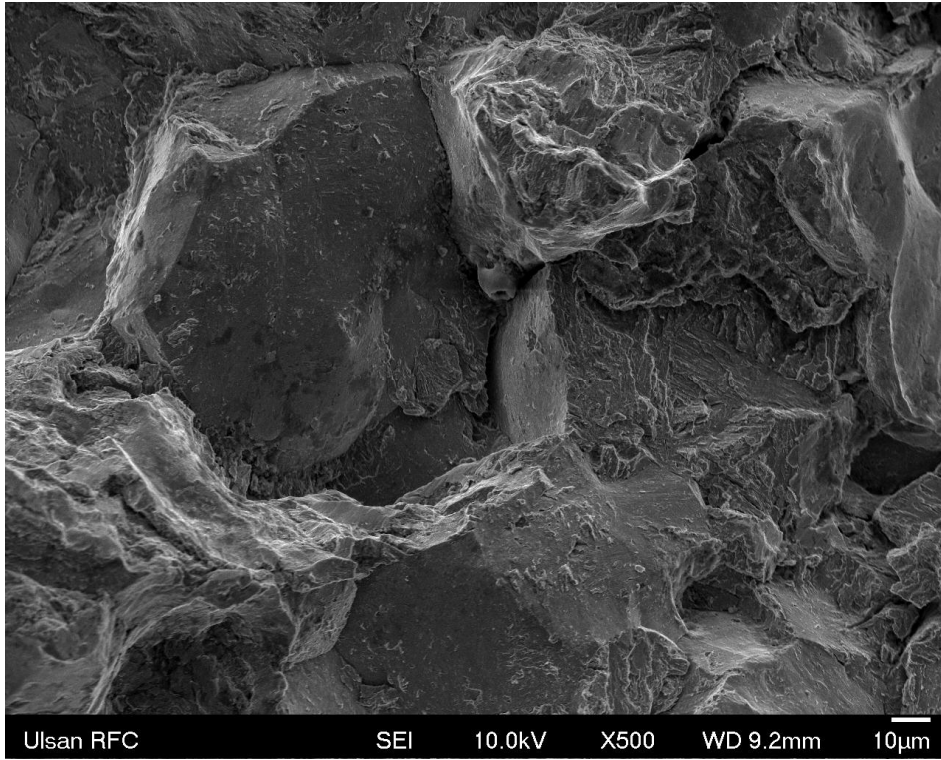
Fractographs of Y-groove specimens fractured at CE-44L specimen
